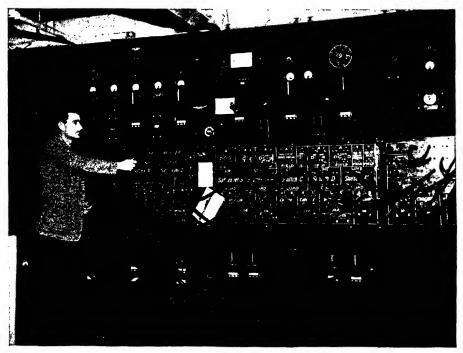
A panel board used in testing electrical equipment. (Courtesy Douglas Aircraft Company, Inc.)
